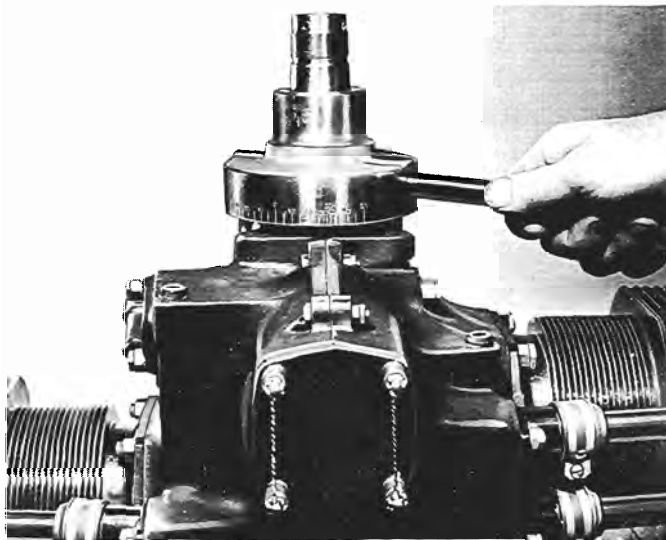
Placing Crankshaft in Firing Positions of No. 1 Piston.
